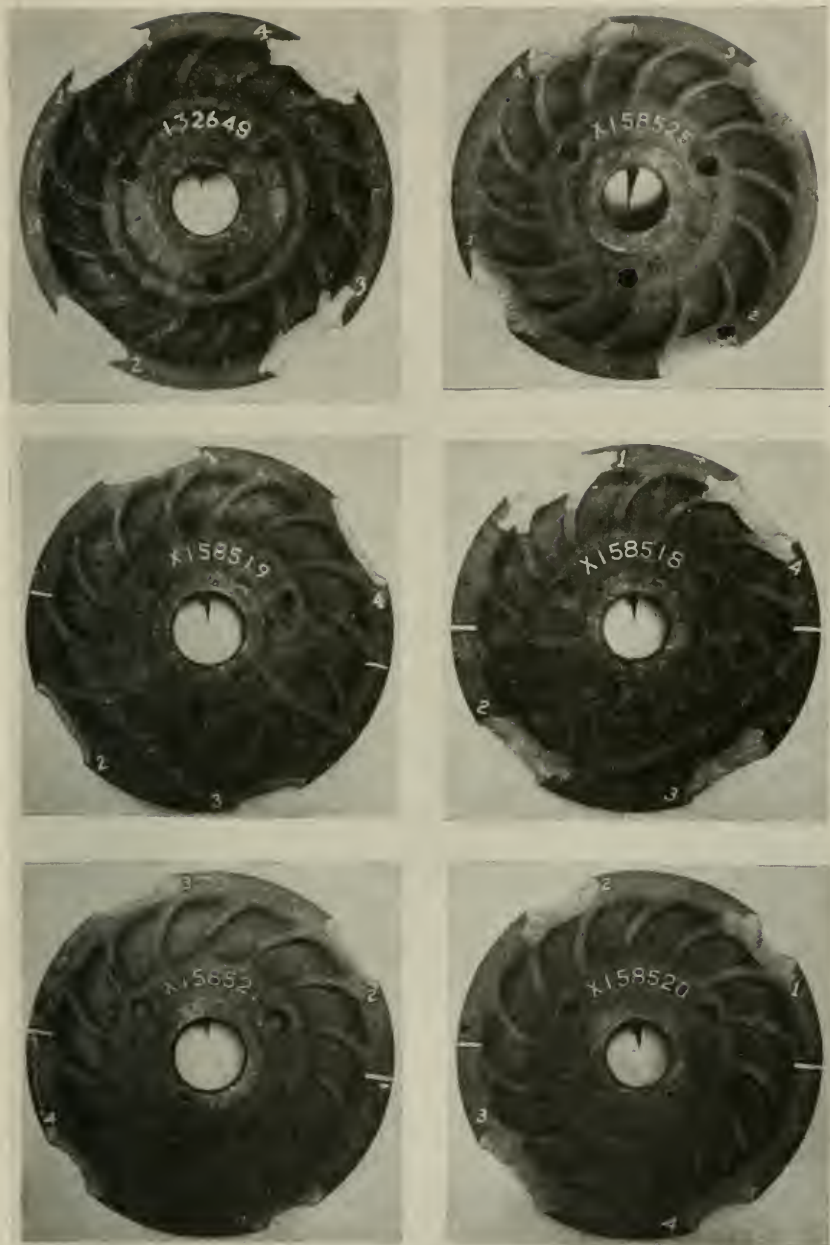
INNER FACES OF WHEELS NOS. 132 649, 158 525, 158 519, 158 518, 158 521, AND 158 520 AFTER FRACTURE OF FLANGE
